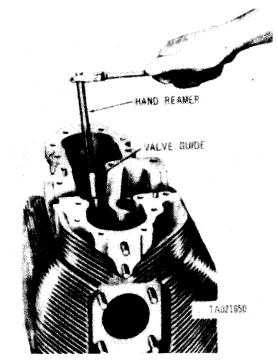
Reaming intake valve guide, using hand reamer and reamer bushing.
